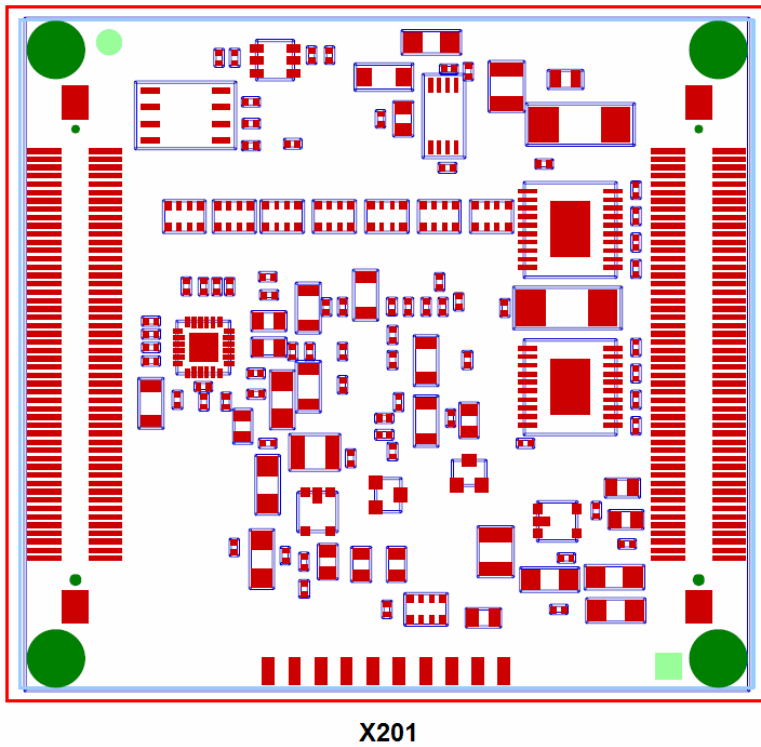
phyCORE-LPC3180 Component Placement, Bottom View
